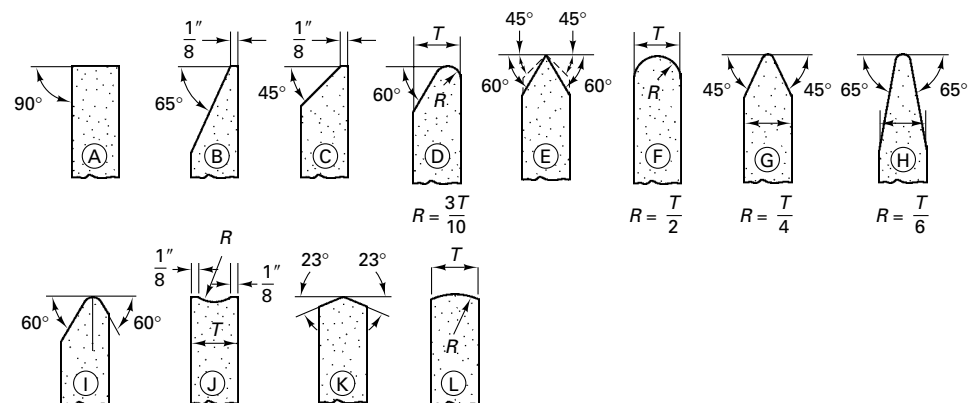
Standard grinding wheel shapes commonly used. (Courtesy of Carborundum Company.)
